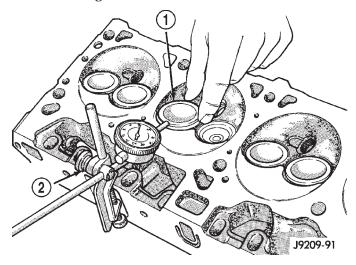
Measuring Valve Guide Wear 1 – VALVE 2 – SPECIAL TOOL C-3339
